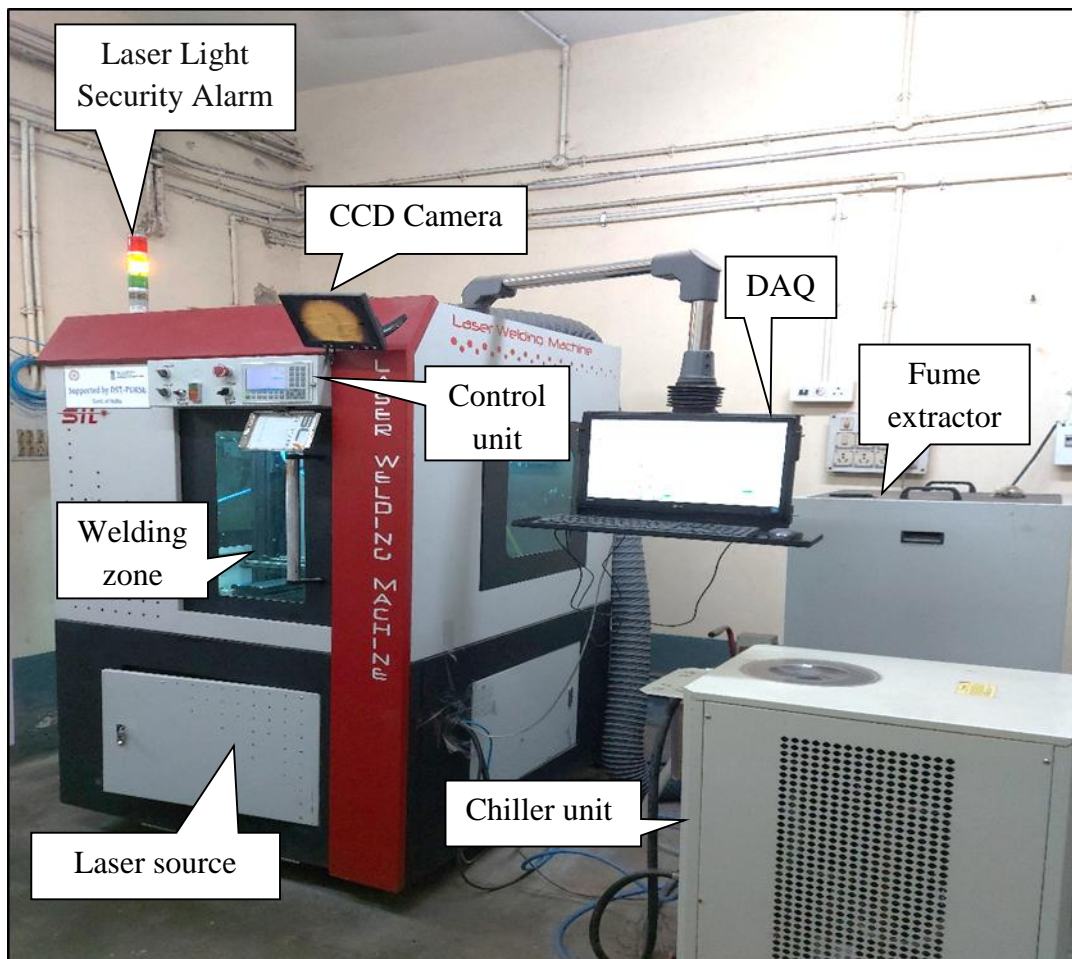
Pictorial view of the Laser Welding Machine
